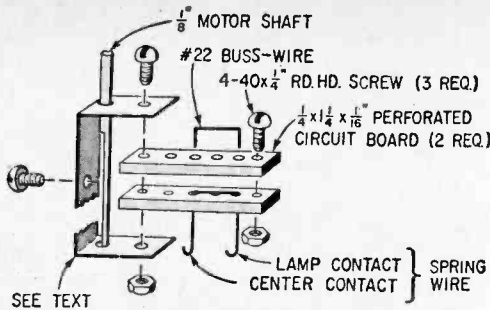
Wiper arm of motor makes contact between center ring of commutator and the lamp contacts with spring-wire brushes.
